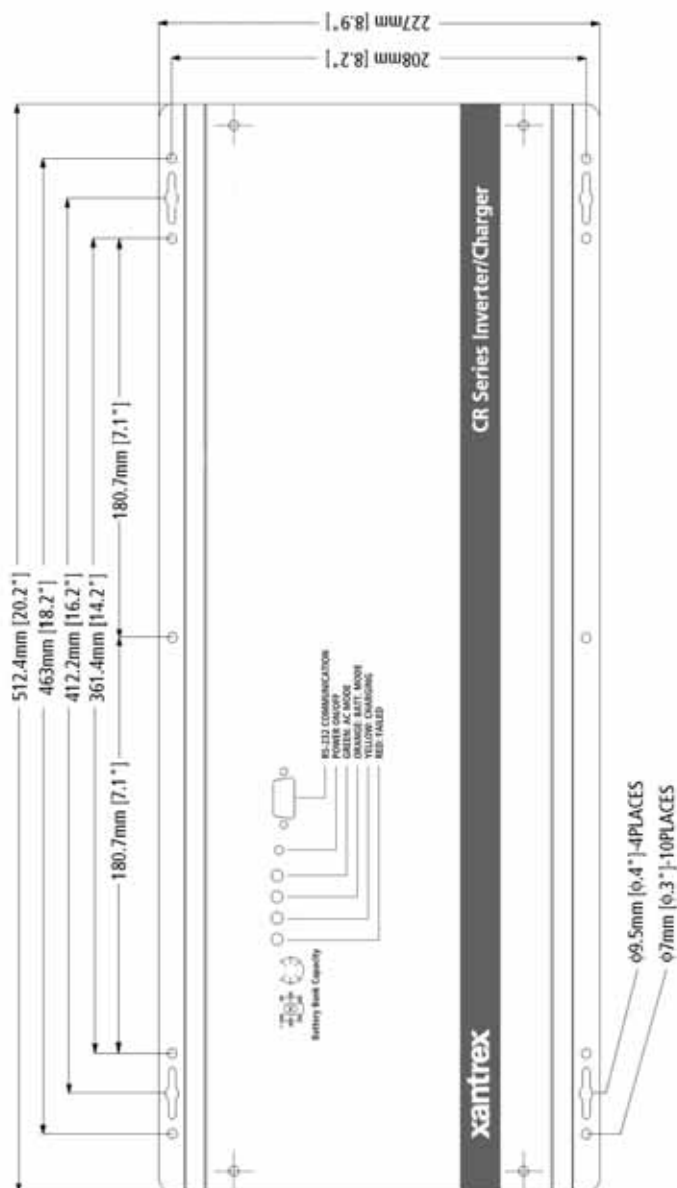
Dimensional Drawings for Screw Hole Placement
